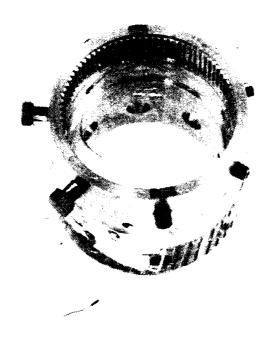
The portion of the motor body from XM-785 projectile used for preparing specimen.
